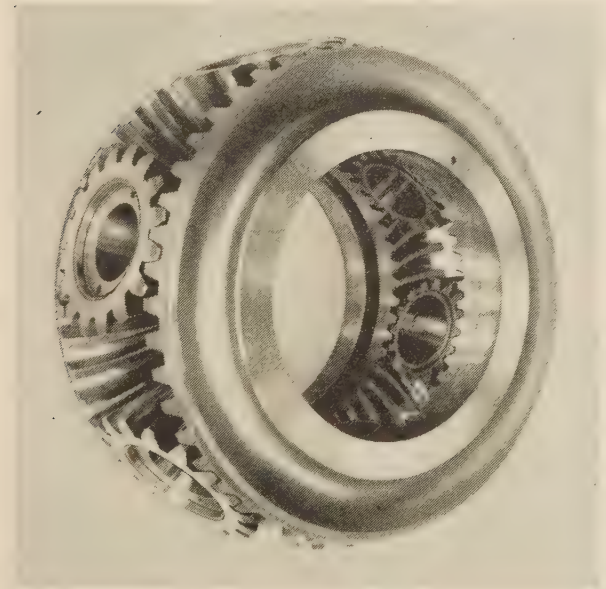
PLANETARY BEVEL GEARS FOR PROPELLER DRIVE
